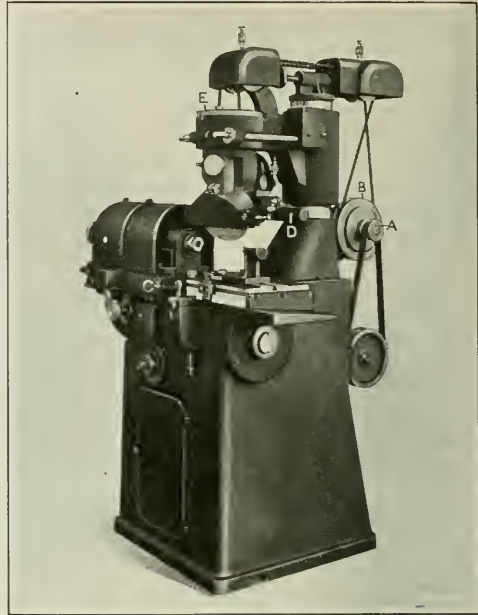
Driving End of Barber-Colman Belt-driven Hob-sharpening Machine
